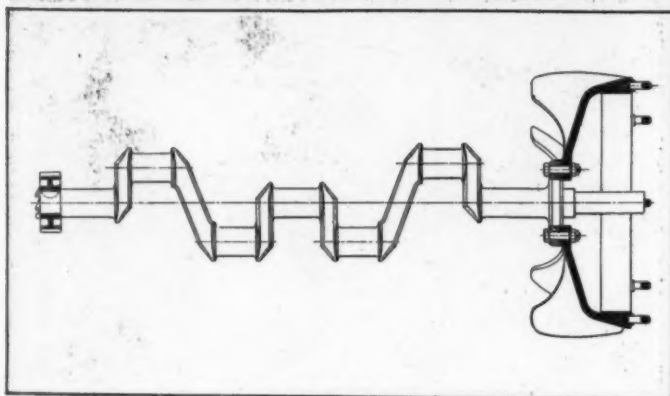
Crankshaft of the motor, showing the method of fastening the half-time gear and the flywheel spider
